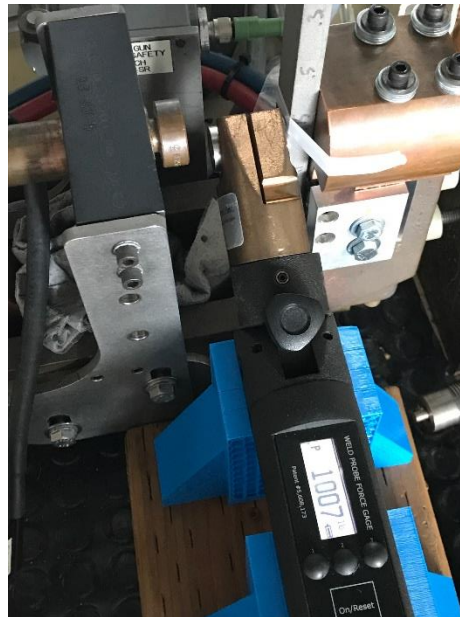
Weld force gun placement for force measurements between the PRW electrodes.
